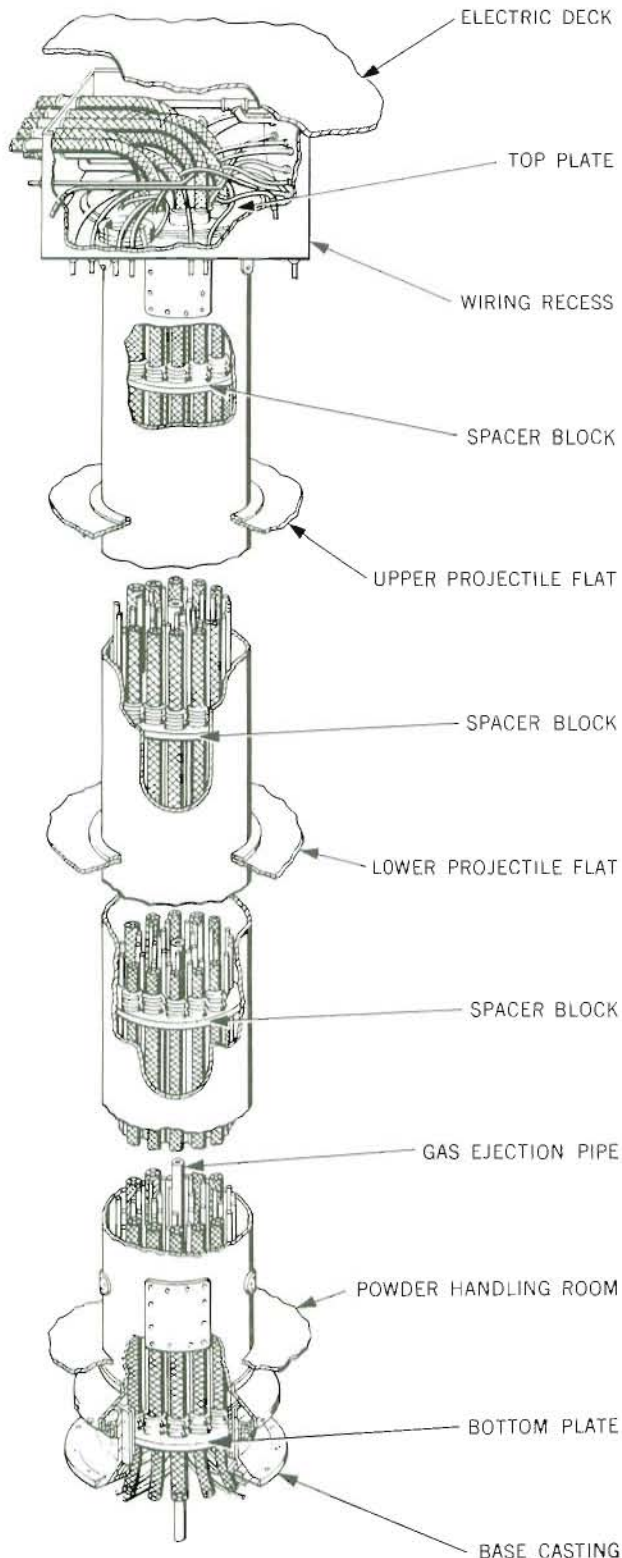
Base Casting and Central Column Wiring Tube Arrangements
